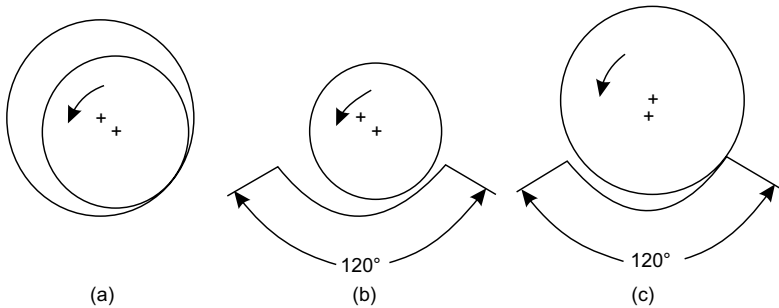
Types of sliding journal bearings: (a) Full (b) 120° partial (c) 120° fitted
